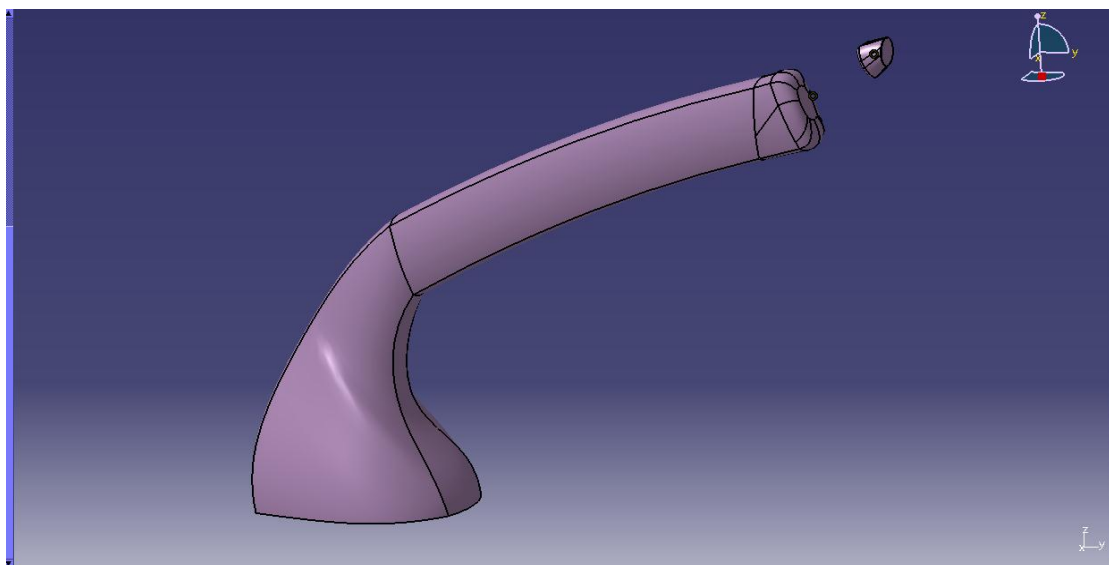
Entities of gearshift's assembly participating in the third coincide constraint.
